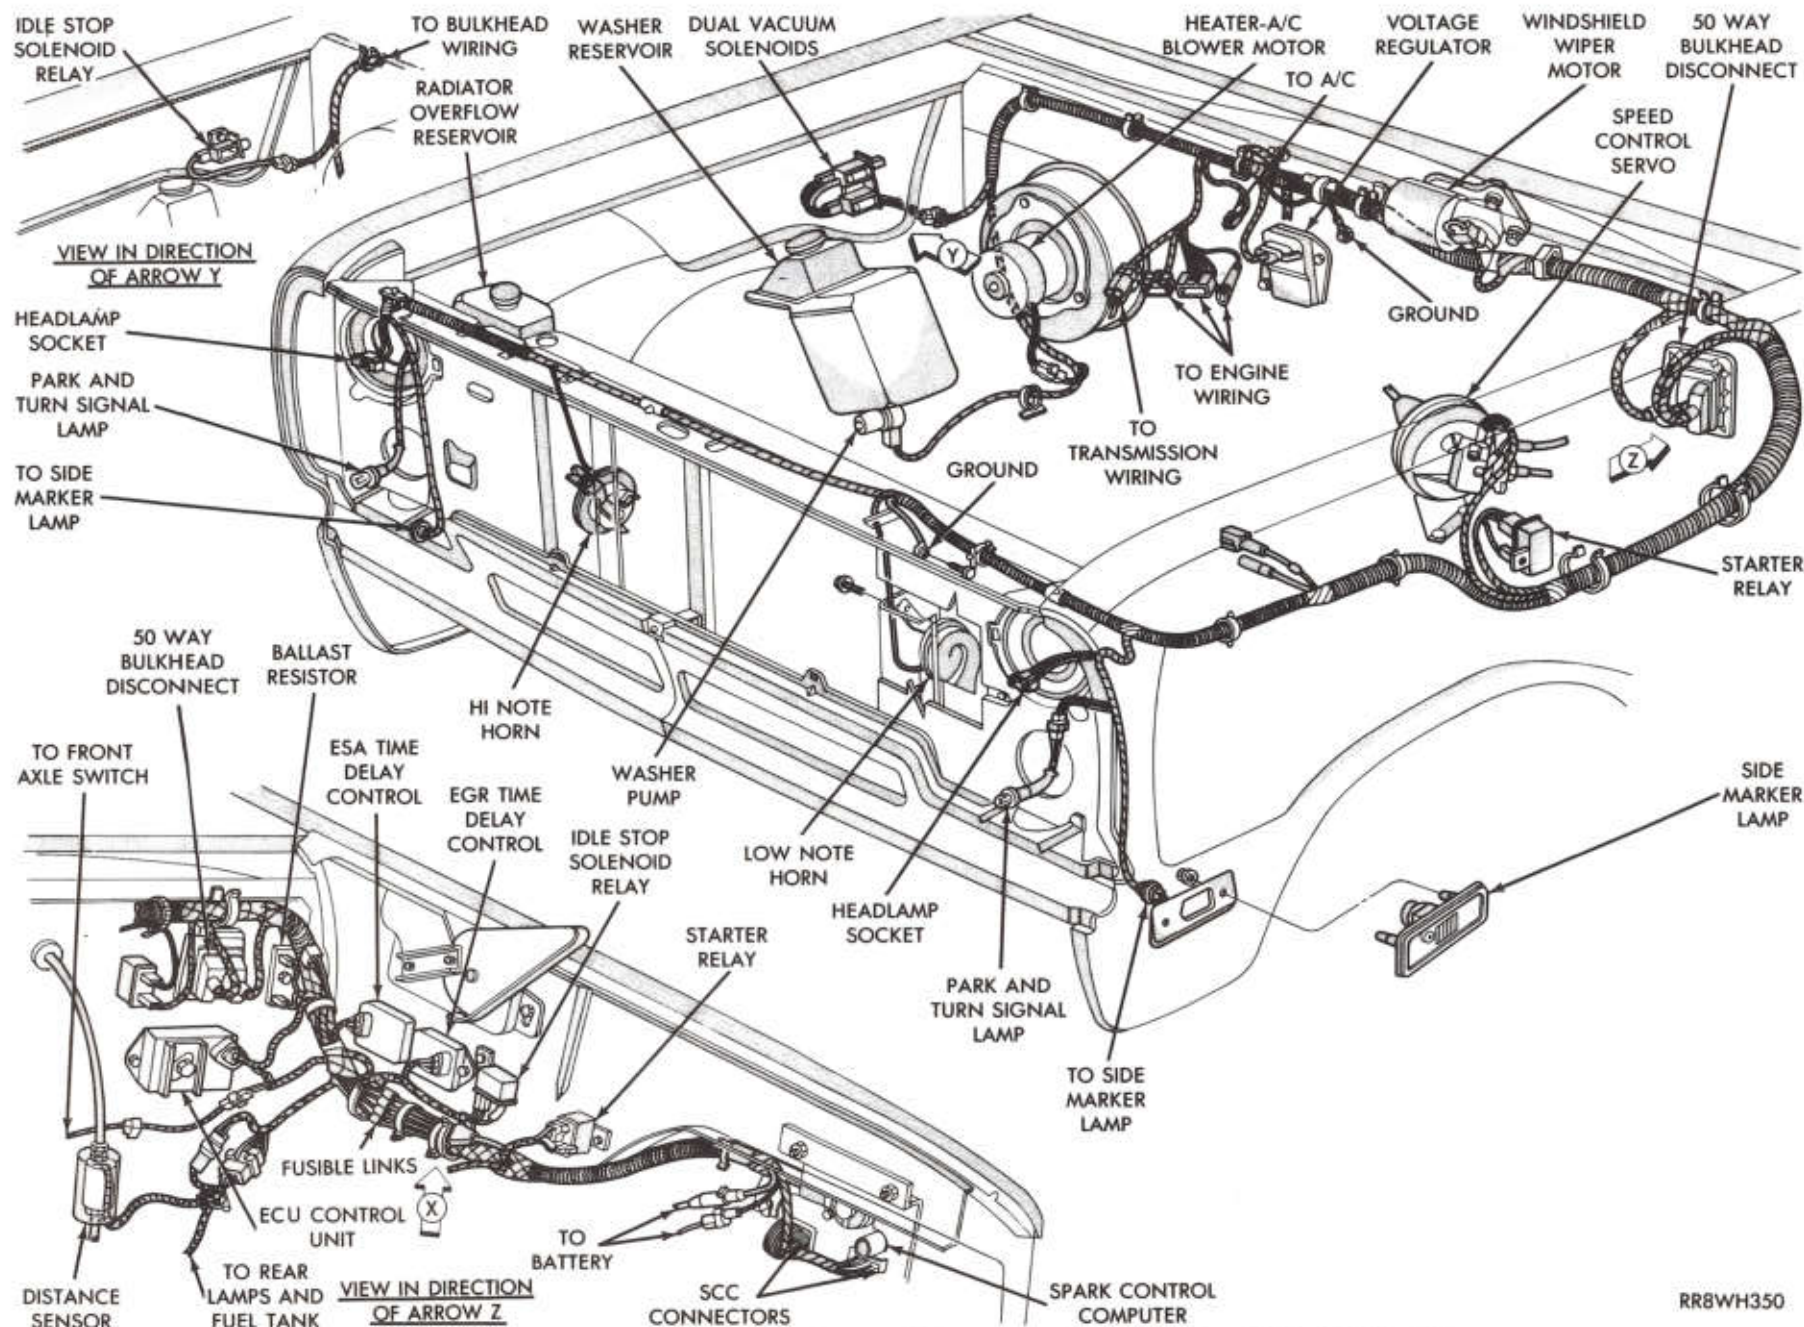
Engine Compartment Wiring and Component Identification With ECU Ignition
